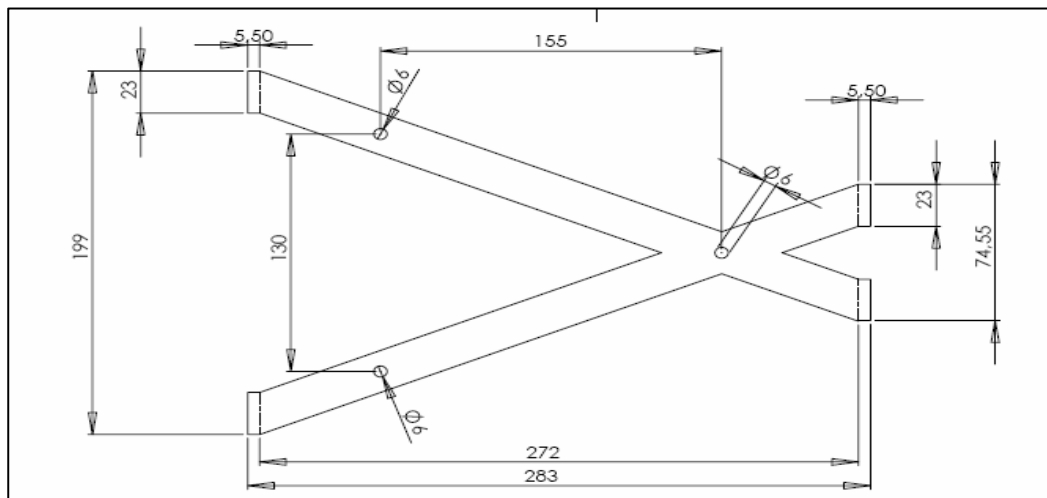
Top view of the support structure with holes for the welded screws. The distance between the center of the holes is 155 mm in one direction and 130 mm in the other direction.
